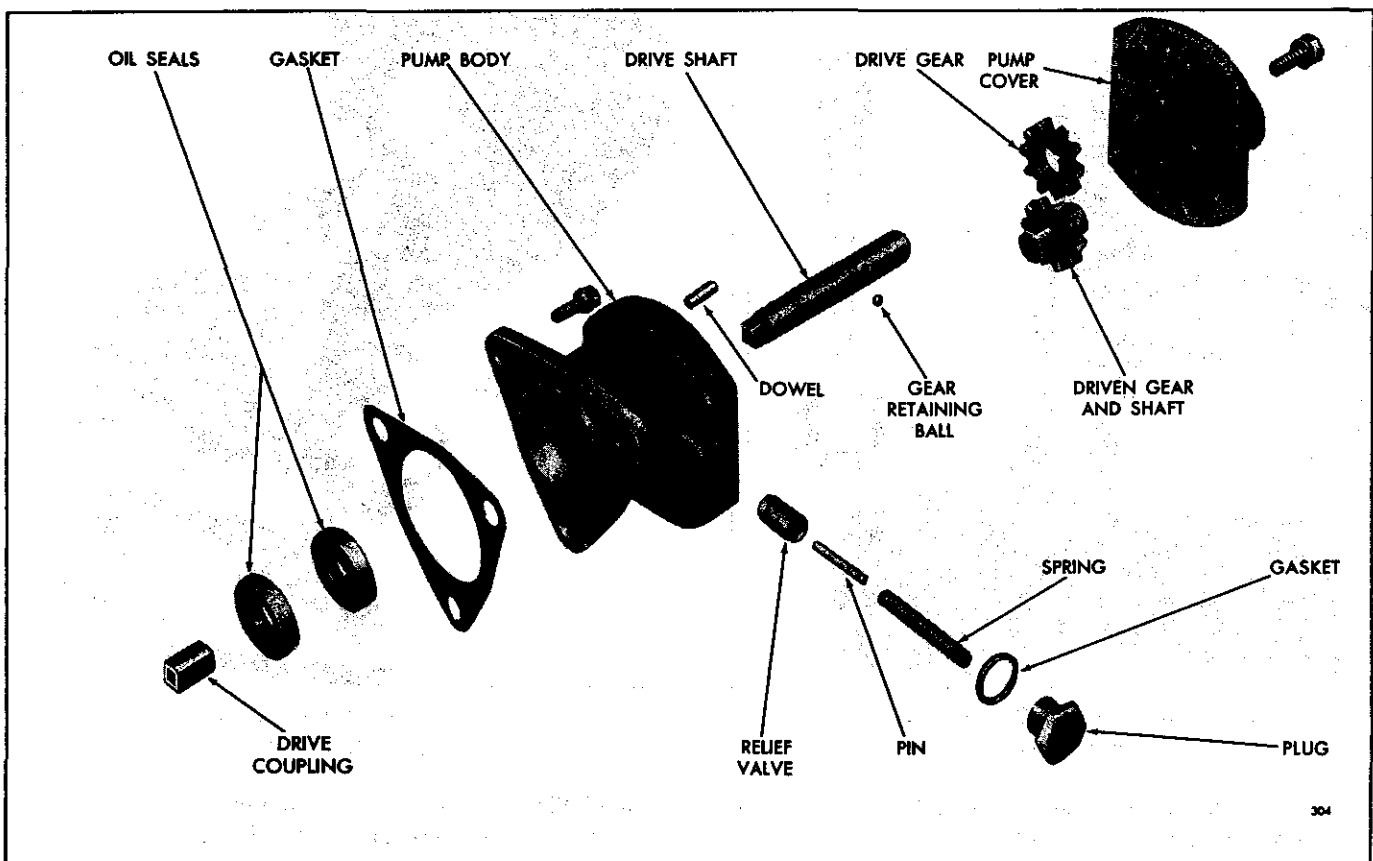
Fuel Pump Details and Relative Location of Parts (Right Hand Pump Shown)
